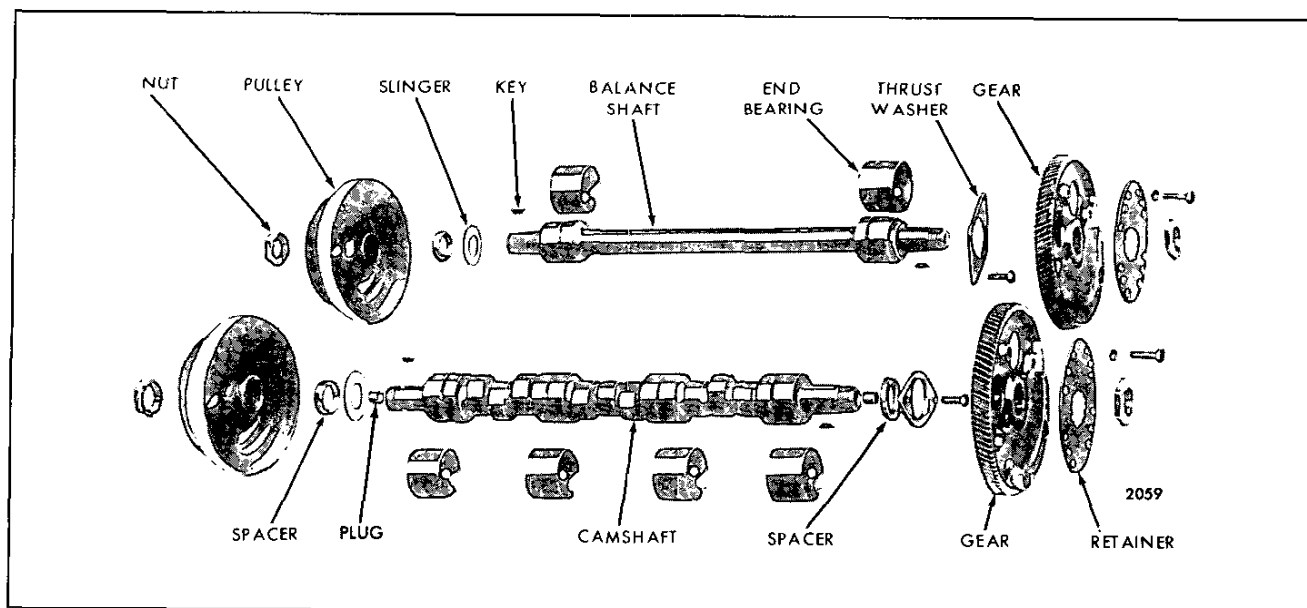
Camshaft and Balance Shaft Details and Relative Location of Parts
